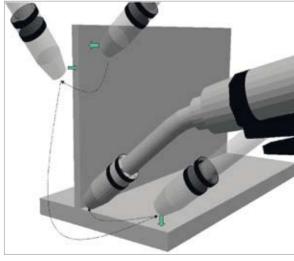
The SmarTac seam finder corrects for any misallignment of the workpiece.
